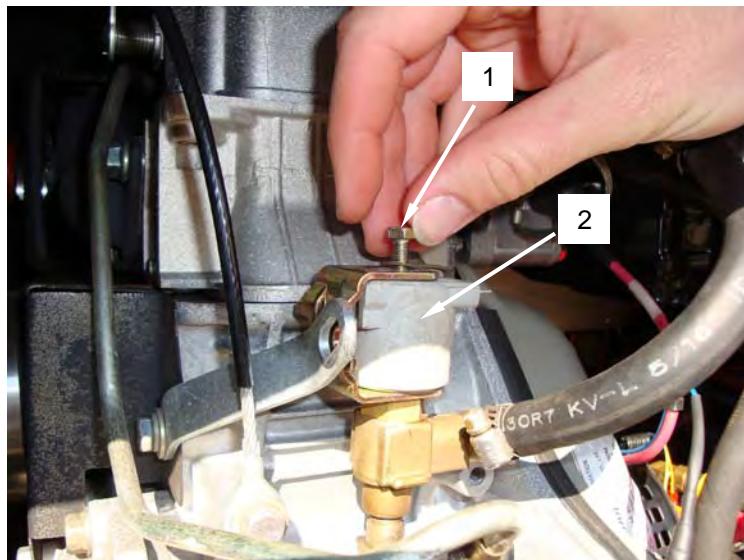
Installing Hex Head Screw on Engine Shutdown Solenoid.
